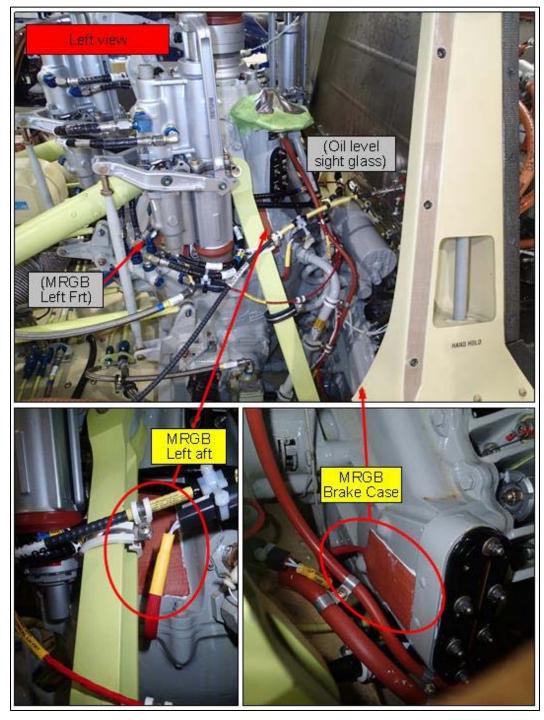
Main rotor gearbox left Pad Heat Elements:
